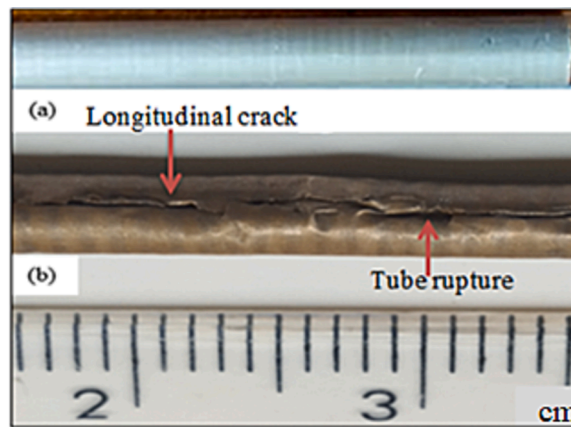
Investigated heat exchanger tubes (a) intact tube, T1 (b) failed tube, T2.
